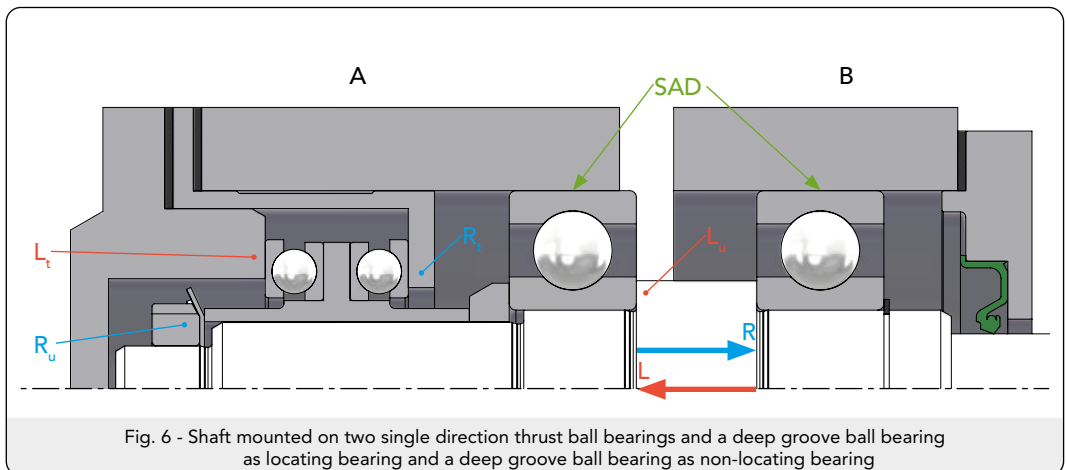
Shaft mounted on two single direction thrust ball bearings and a deep groove ball bearing as locating bearing and a deep groove ball bearing as non-locating bearing
